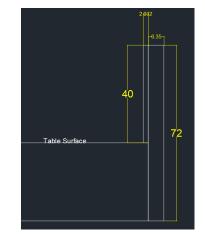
Side view of the clear acrylic added to front of holders. Image provided by the Lazer Pong project team.
